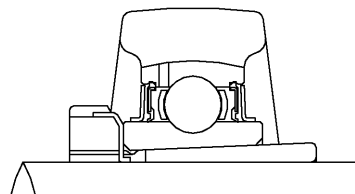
Lubrication-free type insert bearing unit (G00 specifications)
